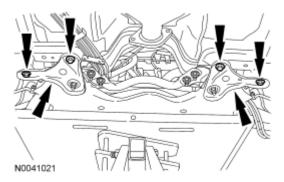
Locating Subframe Support Brackets And Bolts Courtesy of FORD MOTOR CO.
